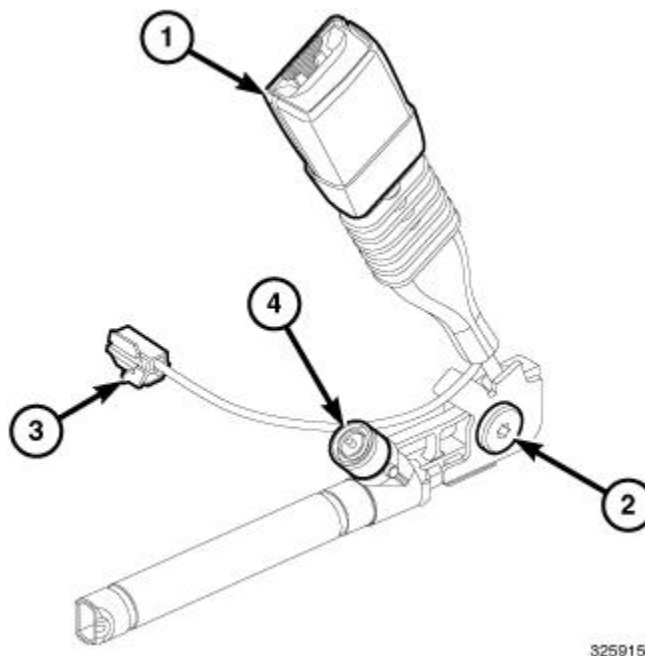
Seat Belt Tensioner Initiator, Buckle And Tensioner, Switch Pigtail Wire Connector & Screw
